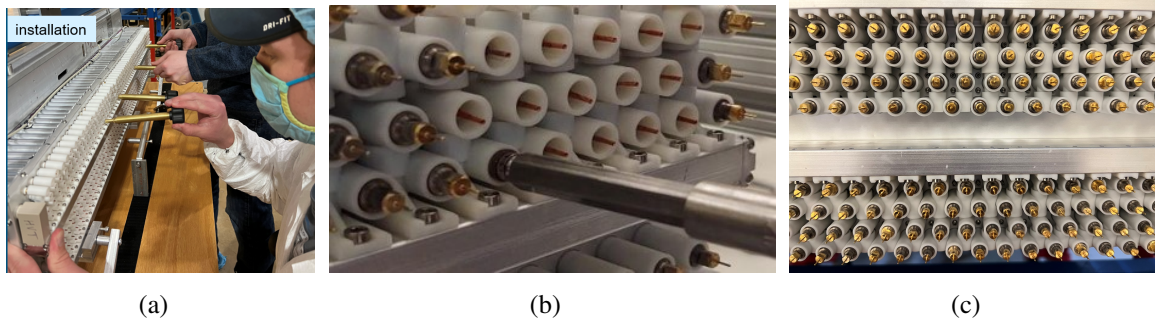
Gas-bar installation on a chamber: (a) fitting a pre-assembled gas-bar on the top ML of a chamber. The brass tools are used to make sure that all gas fittings are fully seated on their corresponding endplugs before beginning to install o-rings. The same tools are used to force an o-ring over the endplug precision surface where it is compressed by the gas fitting; (b) after the back o-ring is in place the signal-cap, which holds the outer o-ring, is screwed onto the endplug. The signal-cap has cross drilled holes which allow the gas from the fitting to enter the endplug and the tube body; (c) Two multi-layers with gas-bars and signal-caps installed.
